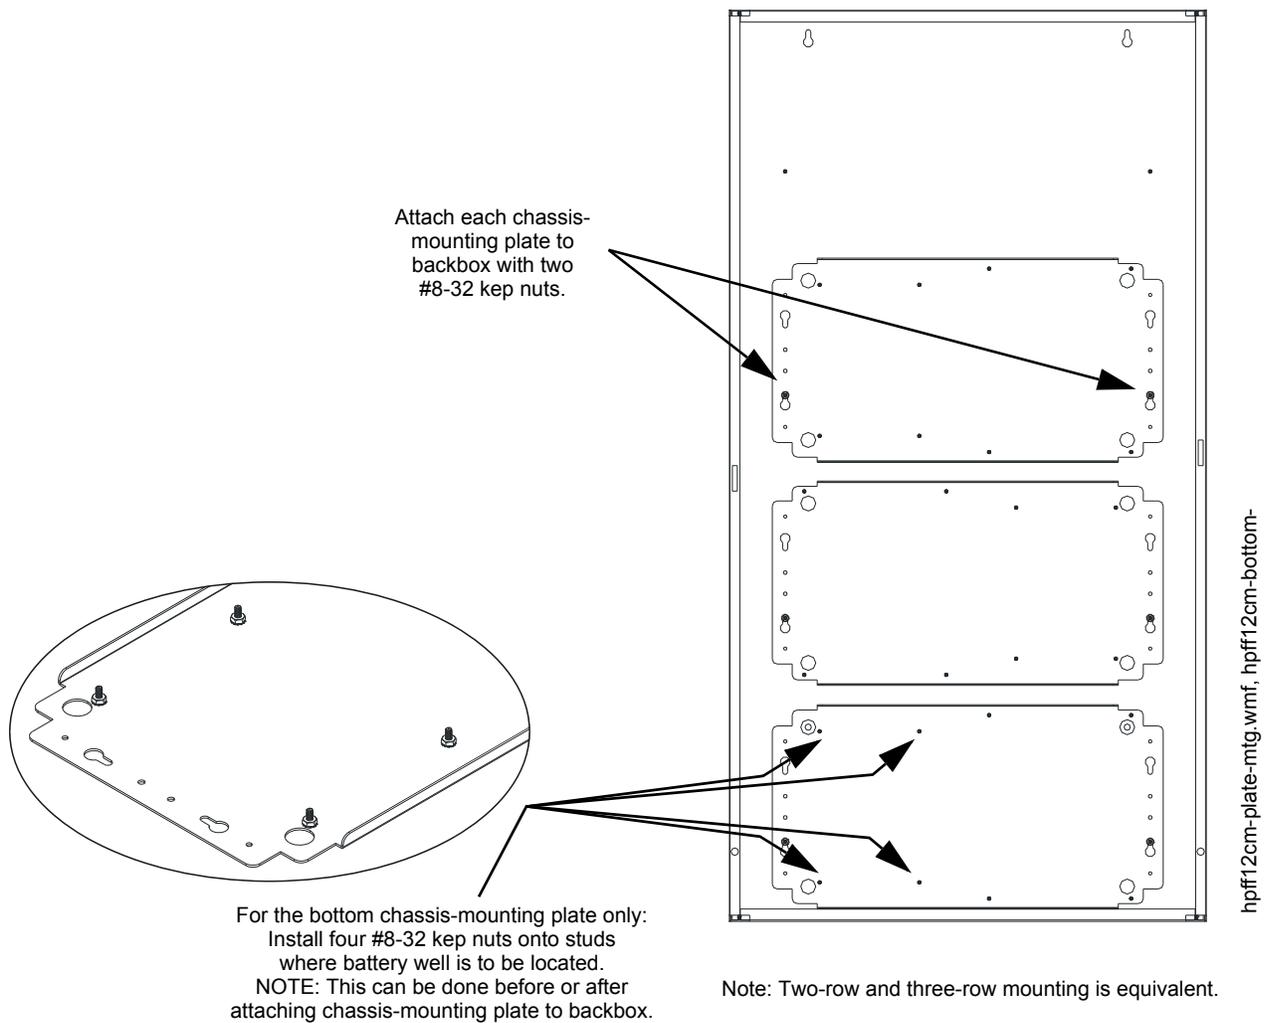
Installing Chassis-Mounting Plates onto Backbox (EQBB-D4 Shown)
